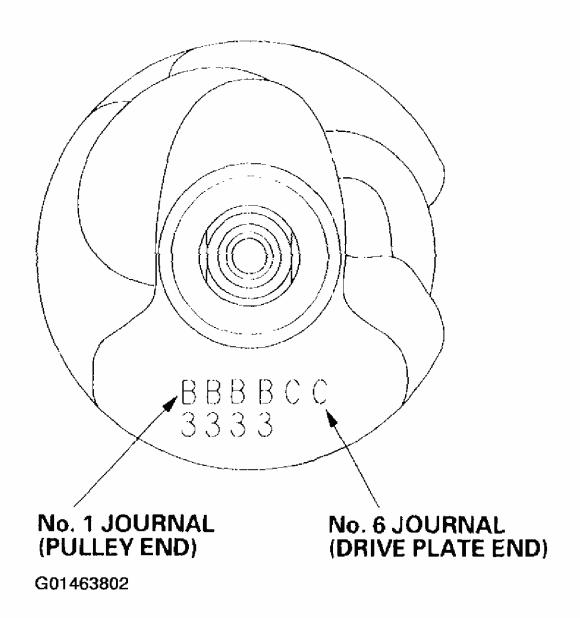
Locating Connecting Rod Journal Code Courtesy of AMERICAN HONDA MOTOR CO., INC.
